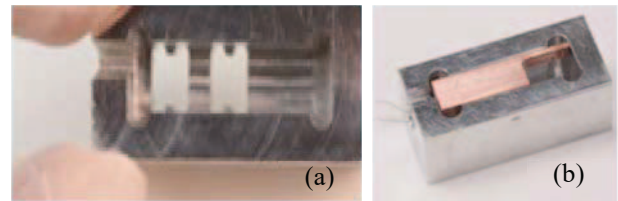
Assembly process for Step 3 showing (a) the machined alignment part and (b) the larger MFC placed on top of the devices to complete the assembly.
